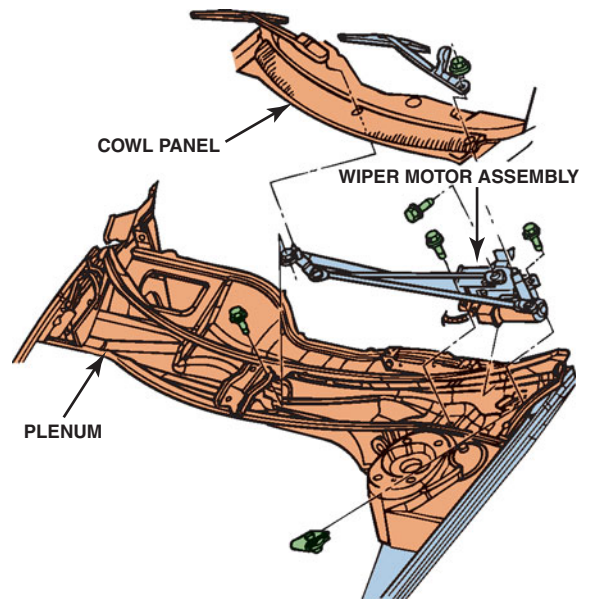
The wiper motor and linkage mount under the cowl panel on many vehicles.
